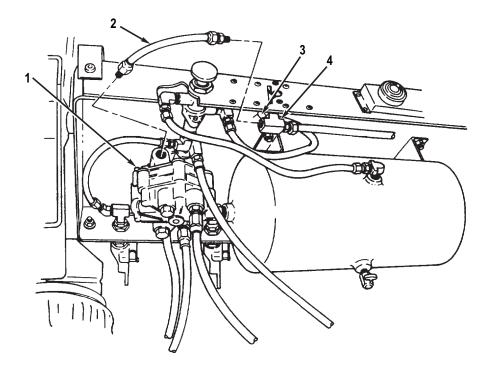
Full Function Valve-to-Parking Brake Valve Tube Assembly Replacement.
